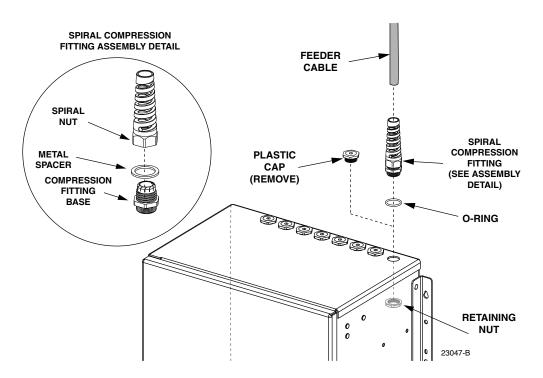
Plastic Cap Removal and Compression Fitting Installation
